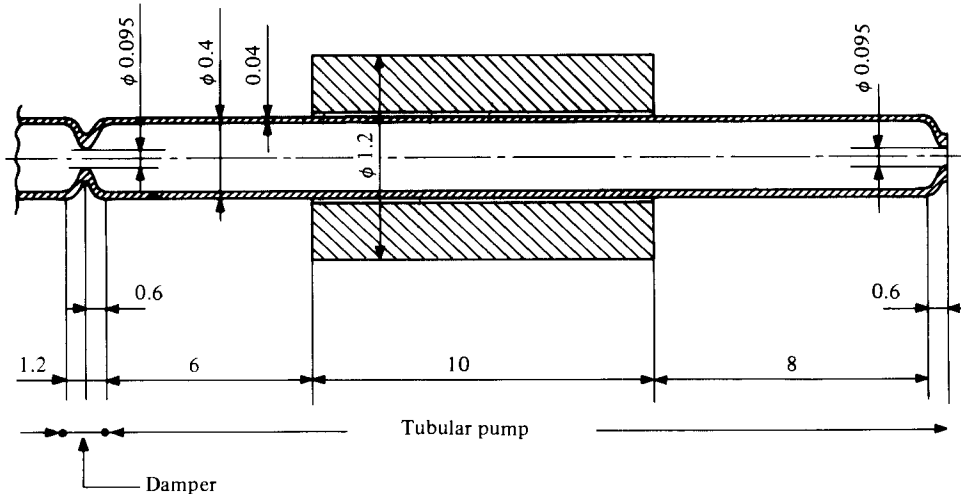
Example of a miniature tubular pump (all dimensions in mm). In the drawing the cross-sectional dimensions are enlarged by a factor of 5 with respect to the length. Glass tube: wall thickness 0.04 mm, Young's modulus 6.4×10^{10} Pa. Actuator: material PZT-5 (Berlincourt *et al.* 1964), radial displacement inside 0.26×10^{-4} mm/100 V, lowest longitudinal resonance frequency 200 kHz. Fluid: ethylene glycol: $\mu = 0.02$ Pa s, $\sigma = 0.05$ N/m, $\rho = 1113$ kg/m³, $c = 1680$ m/s (Weast 1974).
